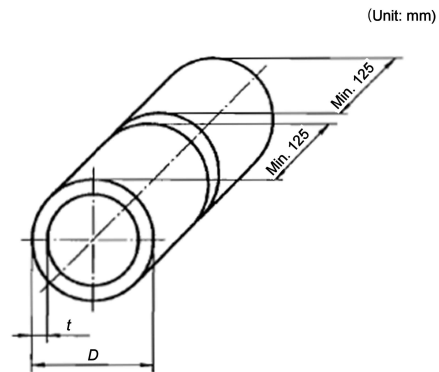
Dimensions and types of test assembly for pipe butt welds
